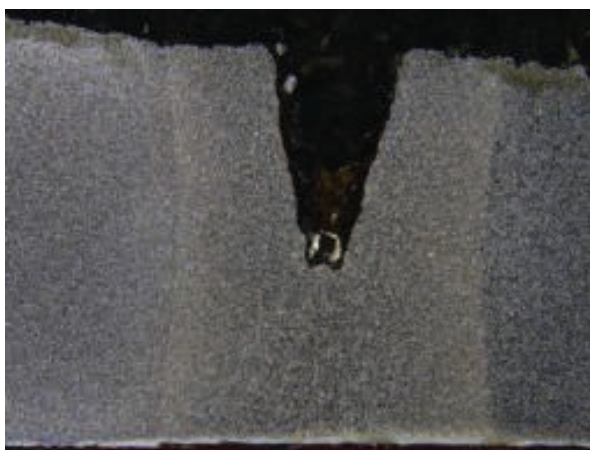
This metallurgical cross section of a sprinkler system pipe reveals grooving corrosion of the longitudinal weld seam. The grooving corrosion is caused by the weld seam being anodic (corroding) relative to the rest of the pipe wall, which is cathodic
